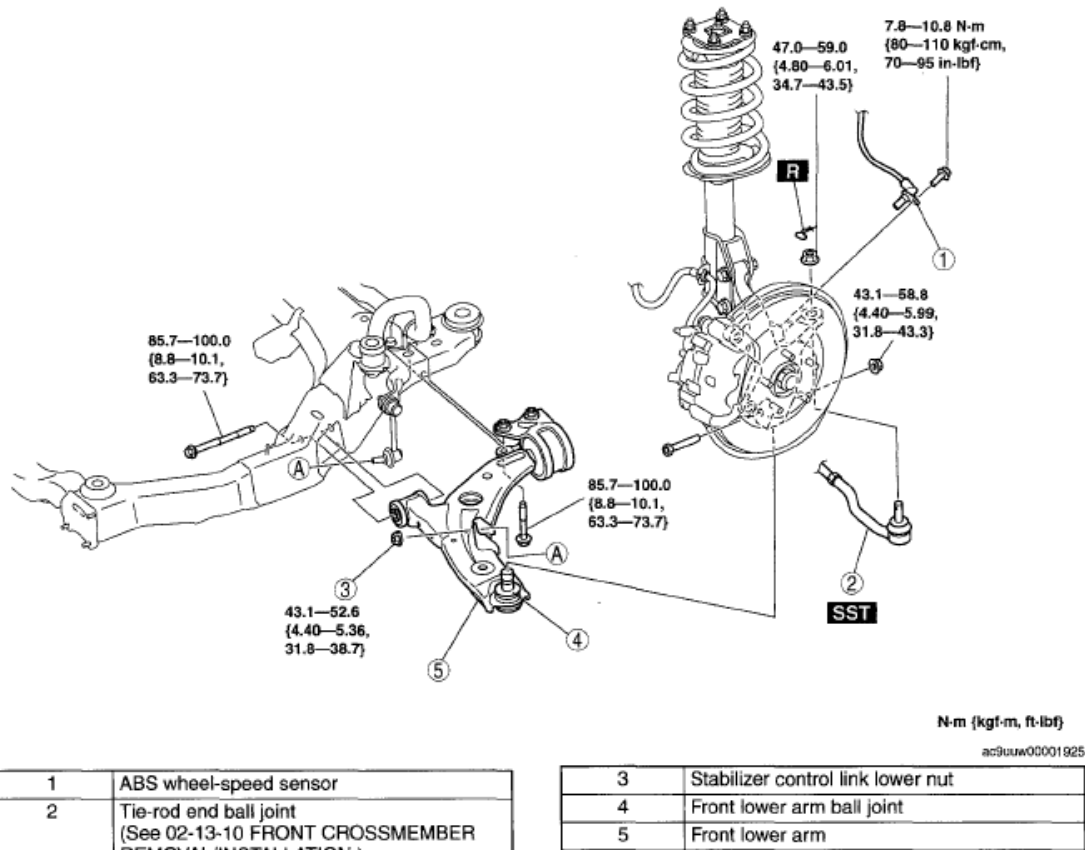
Identifying Front Lower Arm Components & Torque Specifications
